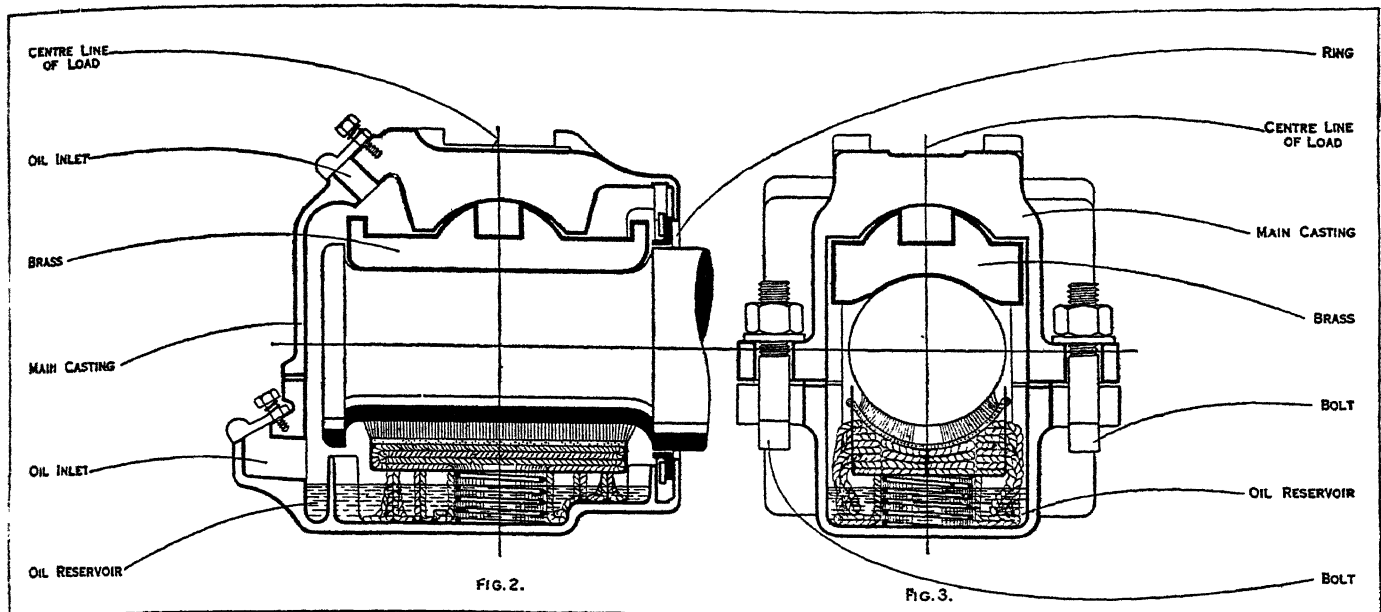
DETAILED DRAWING OF A PLUMMER BLOCK
